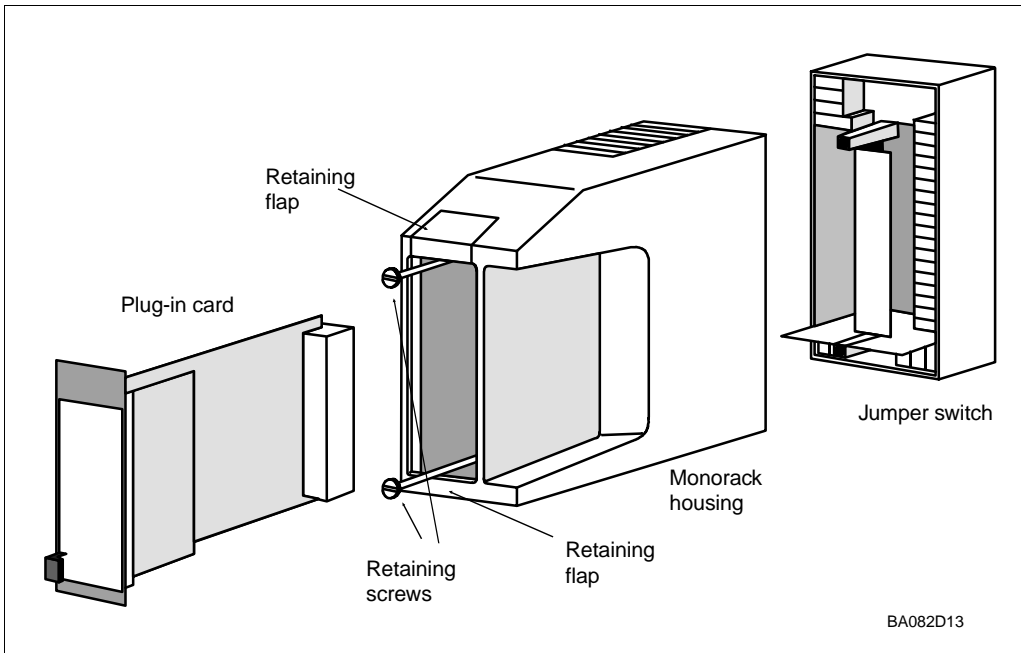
Assembly and disassembly of the Monorack II housing
